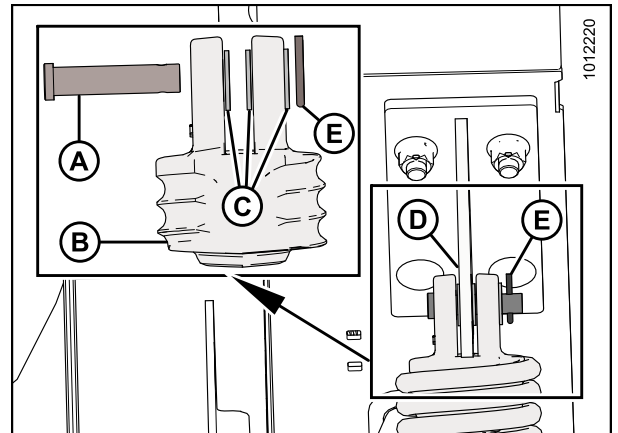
Left Side Spring Float Assembly Shown – Right Side Opposite
